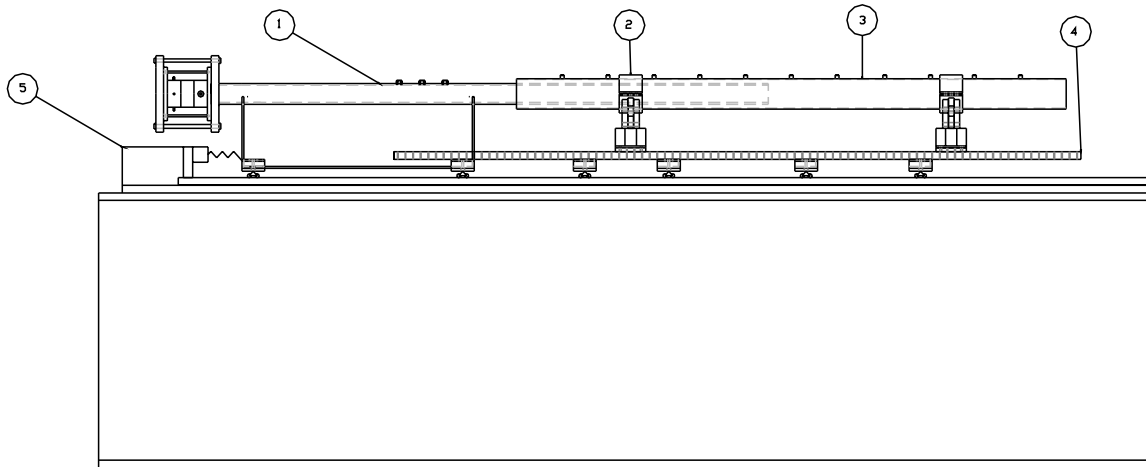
Assembly drawing of modular pulse detonation ejector system.
